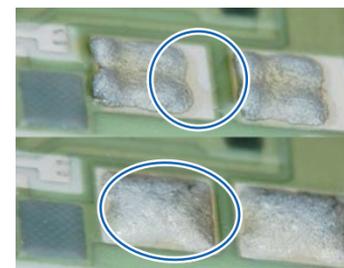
Heat dissipation from the pattern during manual soldering creates good gloss on the fillet.
